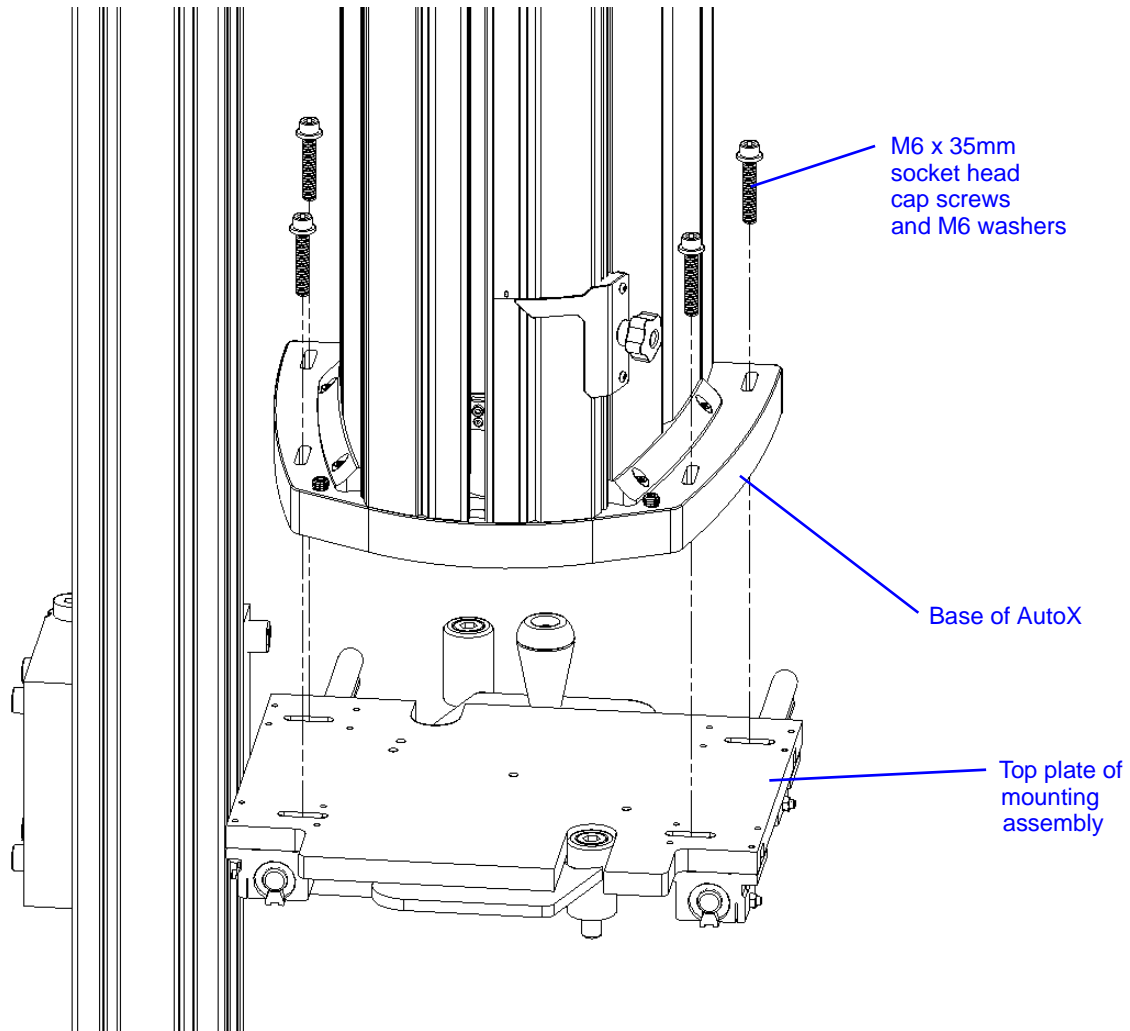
AutoX Mounting Screws (Electromechanical Frame Mounting)
